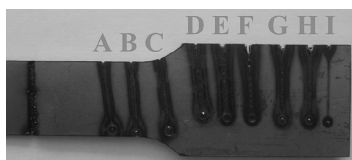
View of the reference specimen with laser pass lines imitating welds
